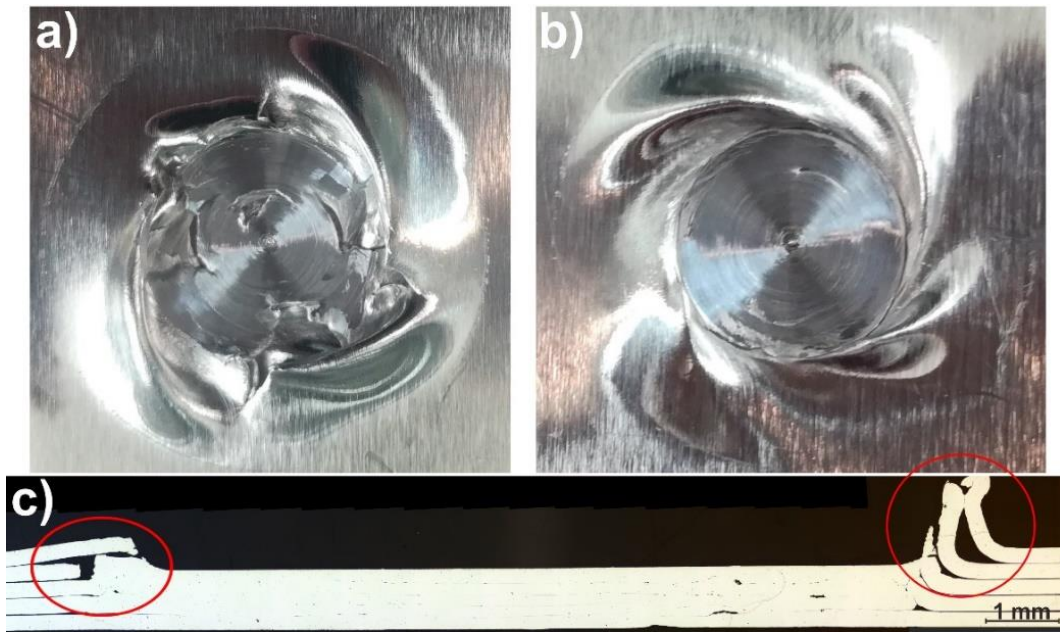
Macrographs obtained from pre-experimental work of two samples and a cross-section view of the samples welded with a flat tool of diameter 10 mm (Al 99.5, five sheets of 0.2 mm thickness) welded with (i) 2000 RPM, 0.2 mm penetration depth and 5 kN axial load and (ii) with 2000 RPM, 0.2 mm penetration depth and 2 kN axial force; red circles show tarred edges of the first two sheets after welding with flat tool sample
